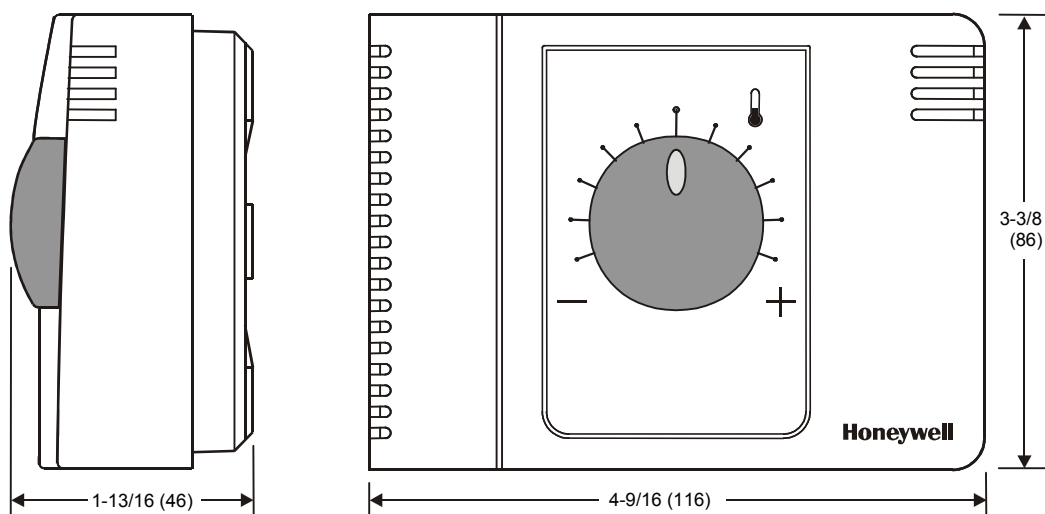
Excel 10 Chilled Ceiling Controller outside dimensions in in. (mm).
